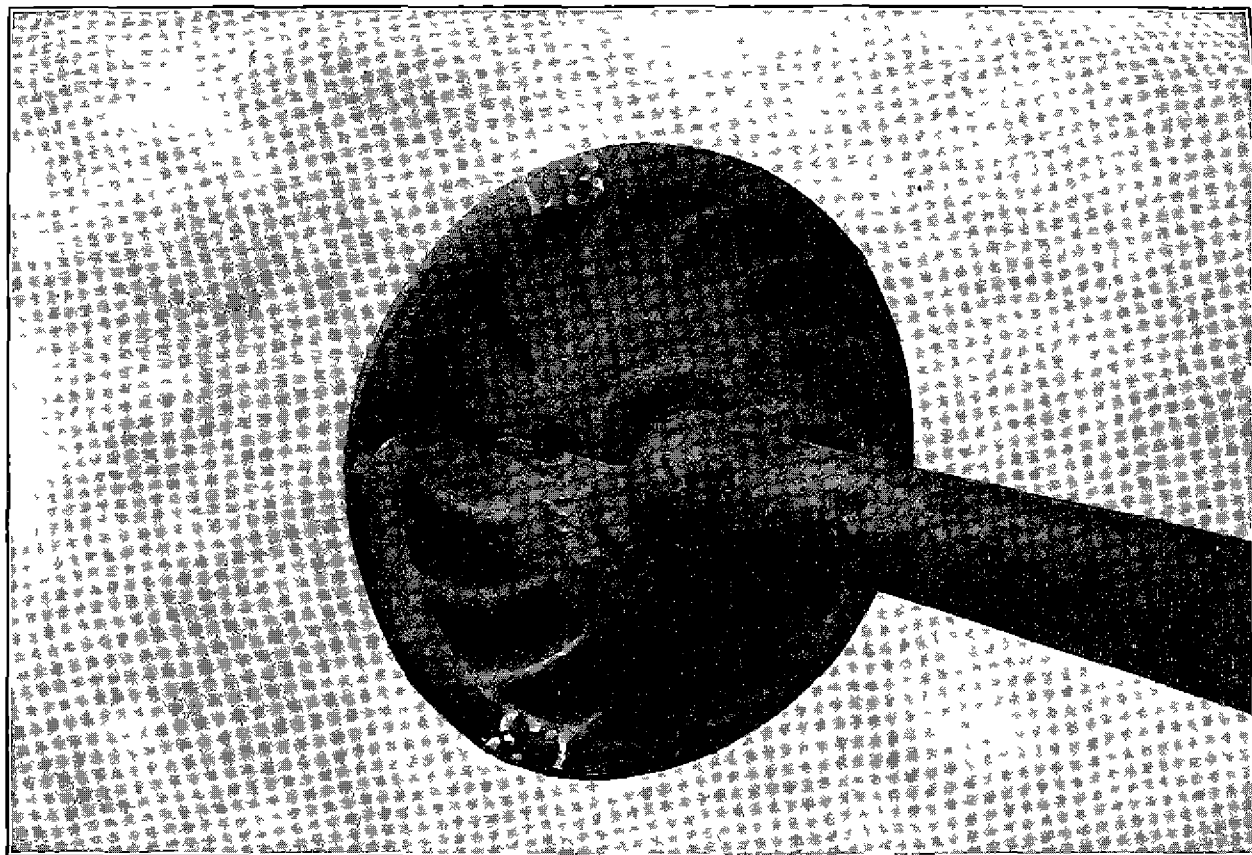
Rear view of broken wheel No 57293 showing radial lines of rupture passing through core leg openings of rear plate
